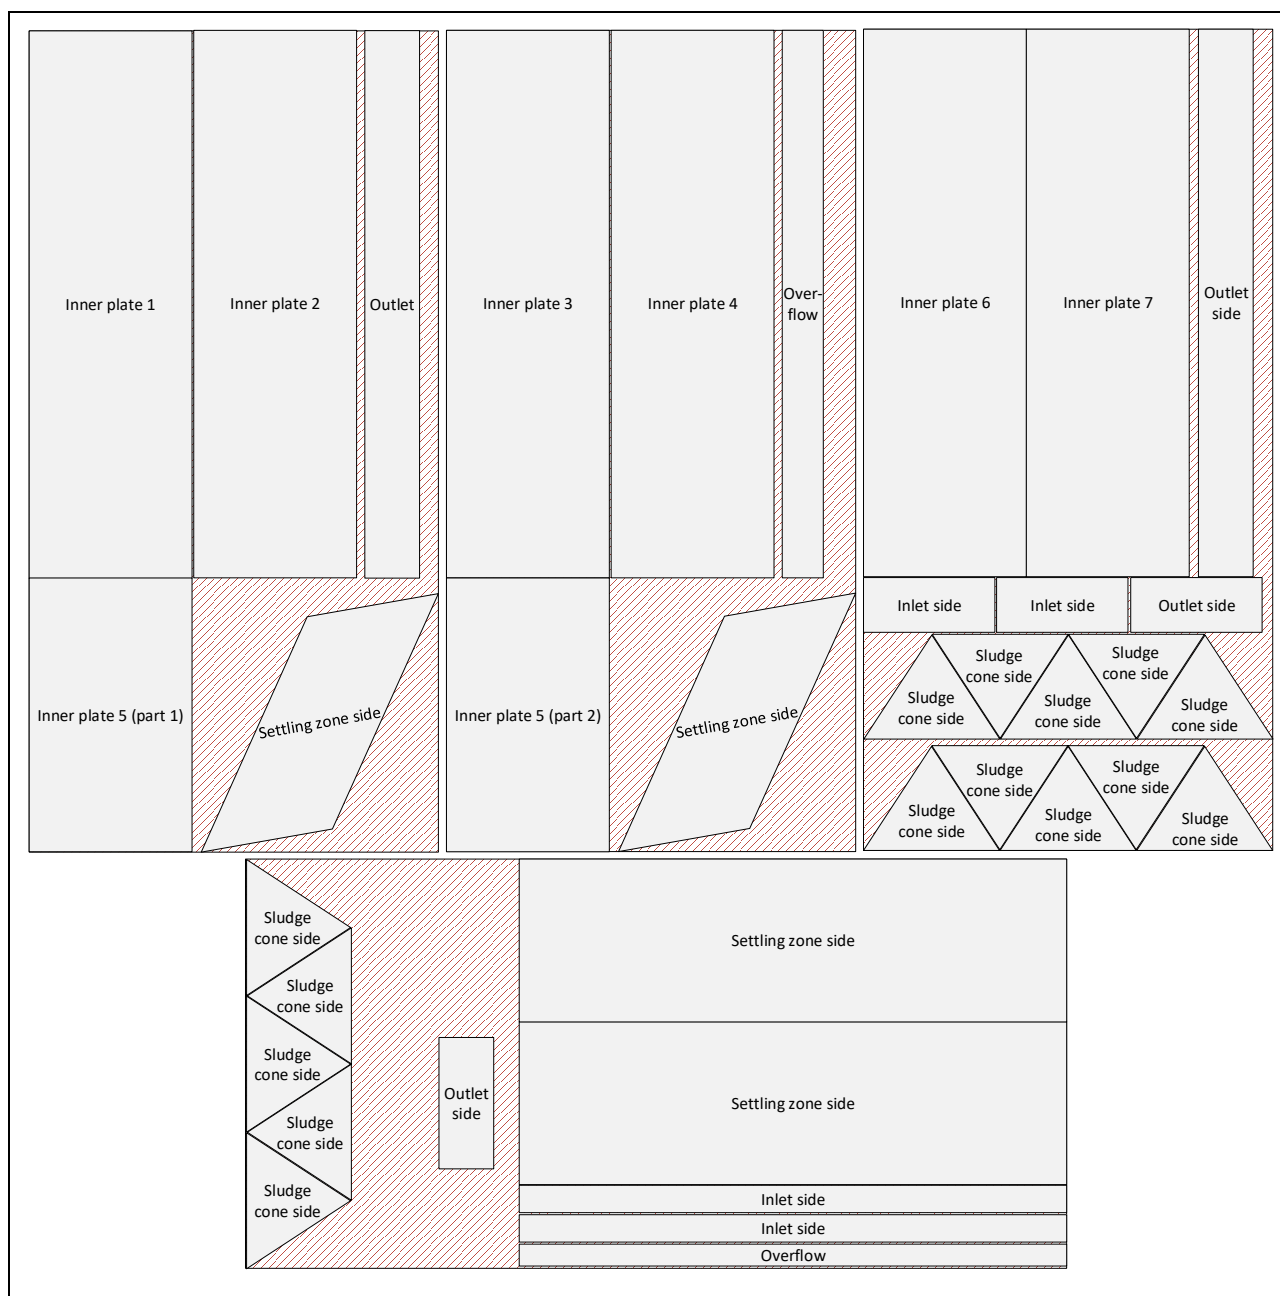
Lamella settler sheet metal cutting pattern on four 3000mm x 1500mm 304SS sheets
